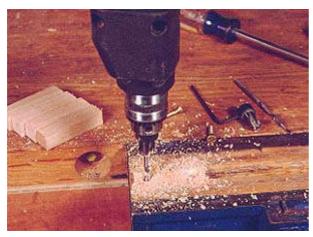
There's a screw block under all those chips from the drill bit! With any screw block it helps to bore out the holes before you go to assembly. This extra step makes the assembly procedure a joy instead of a nightmare.
